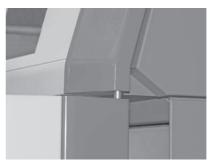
Attaching the operating panel, hooking cladding door onto bolts
